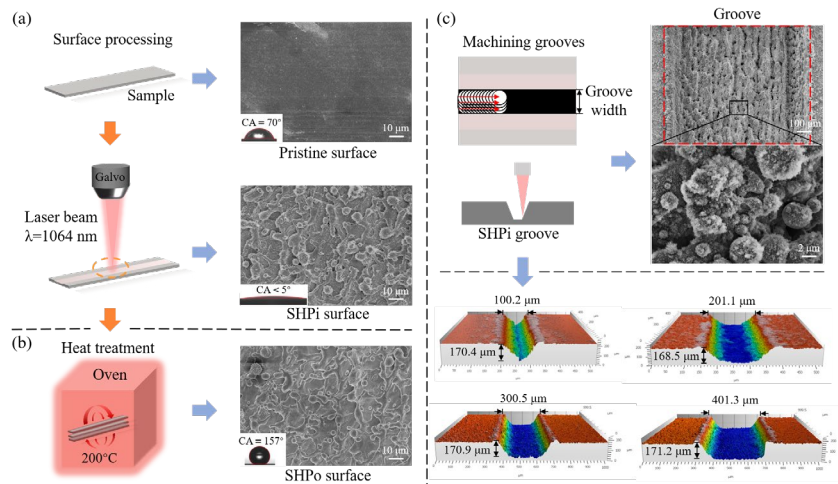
Sample processing diagram. (a) Laser surface processing. (b) Heat treatment. (c) Machining grooves.
